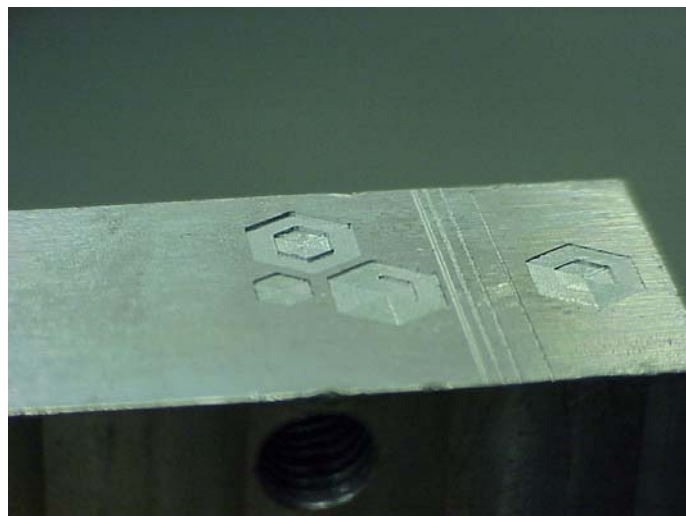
Hexagonal Cutting Test in Aluminum to Determine the Minimum Wall Thickness Possible with a 254 μ m Tool
